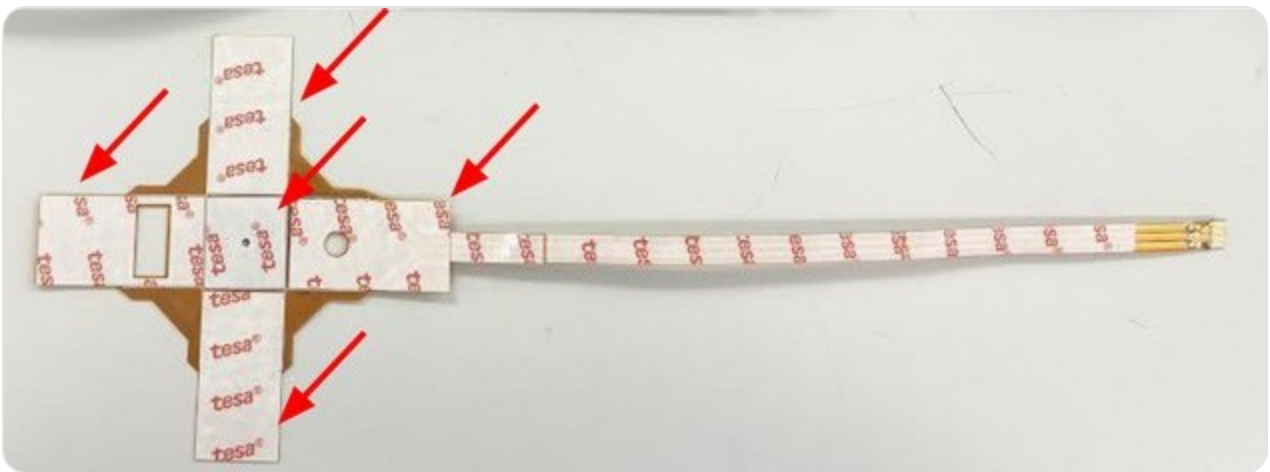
Remove the adhesive backing from the five indicated sections of the vector coil flex-PCB.
